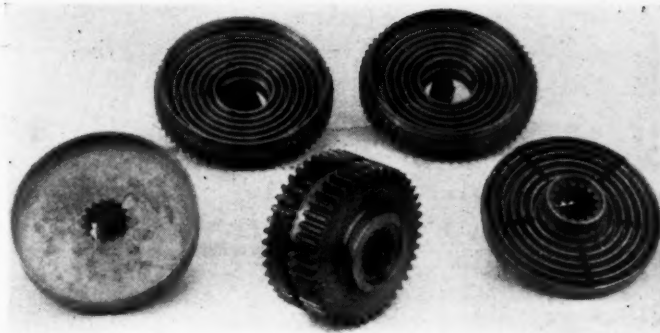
Gear with concentric internal cone clutch operated by oil pressure
